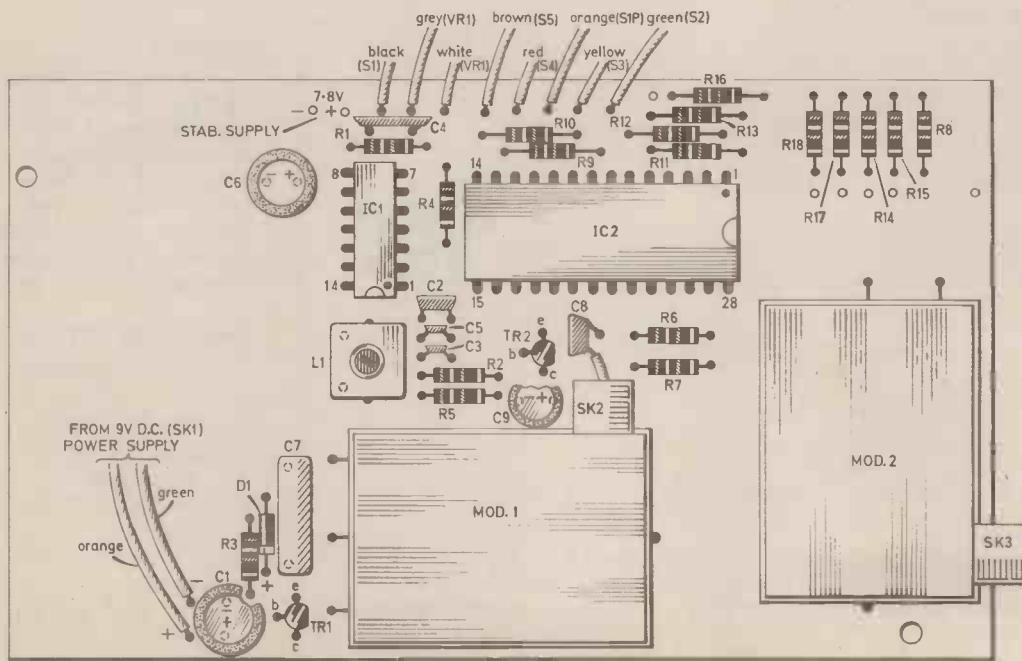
Top view of the p.c.b. showing location of components and flying leads to front panel and jack socket.
